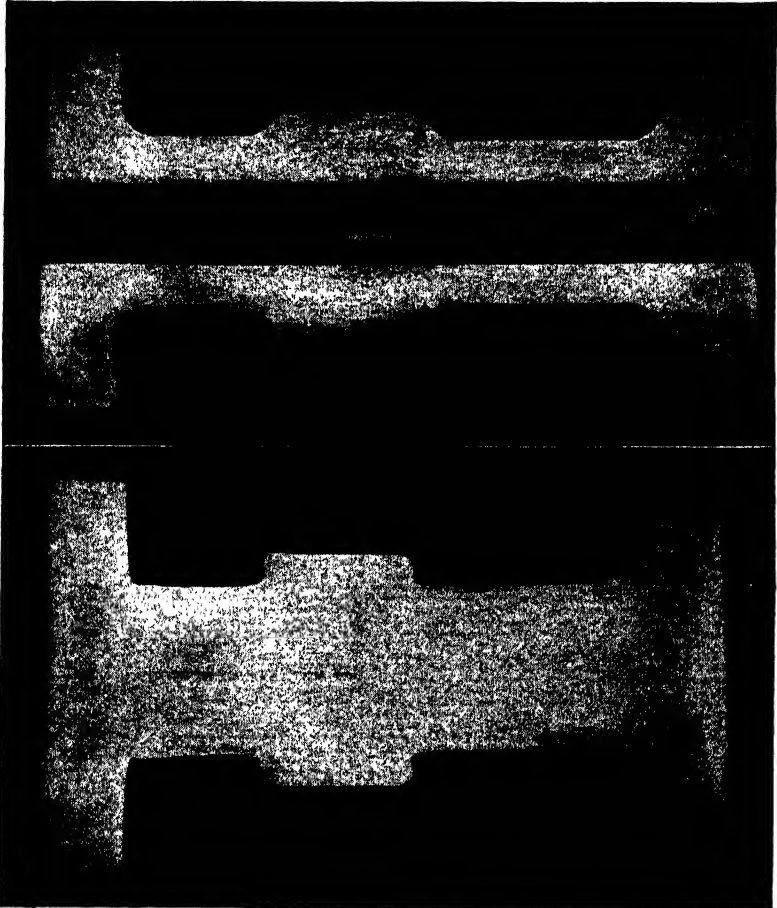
Comparison of grain flow in two automotive counter gear die forgings, that at top being upset and pierced and that below being upset only. (Courtesy of Buick Motor Division.)
